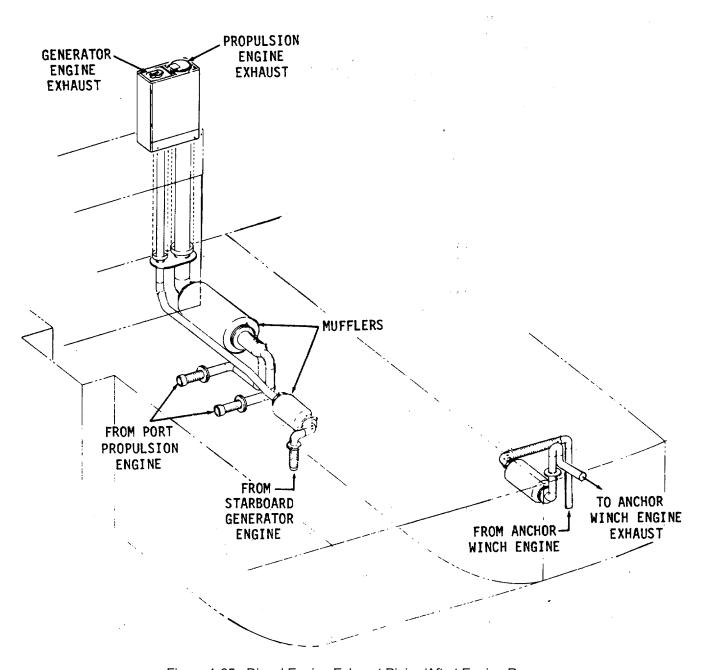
Diesel Engine Exhaust Piping/Aft at Engine Room
